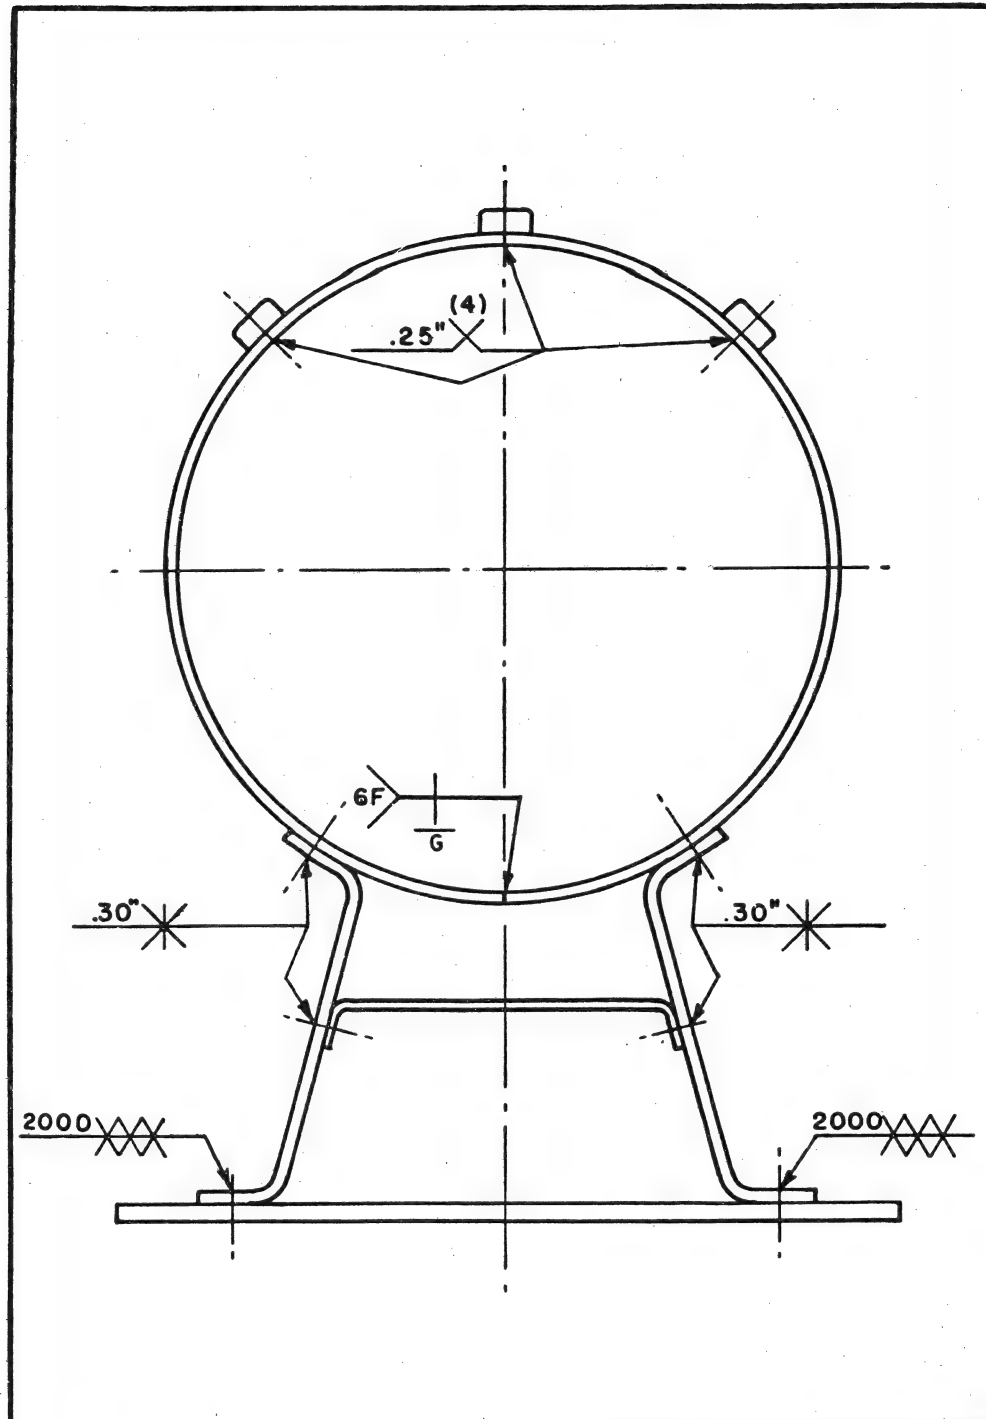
Use of Resistance Welding Symbols on Sheet-Metal Fabrication Drawing
